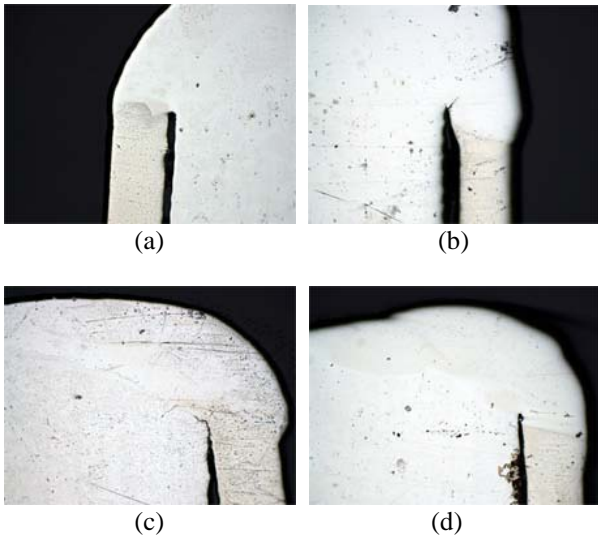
A crack at the welded part between the material of the SUS304 body and nickel membrane.
